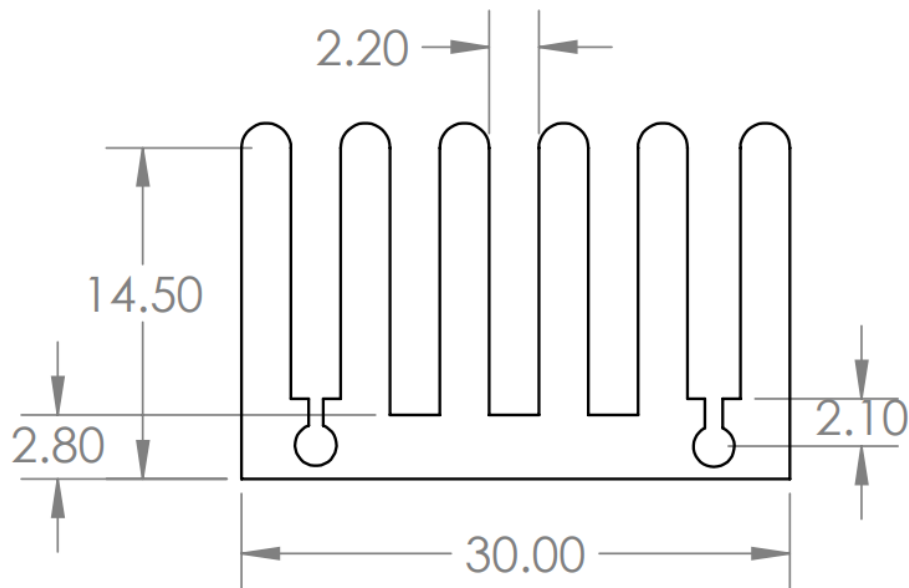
30×30 mm heat sink schematic (dimensions in millimeters)
